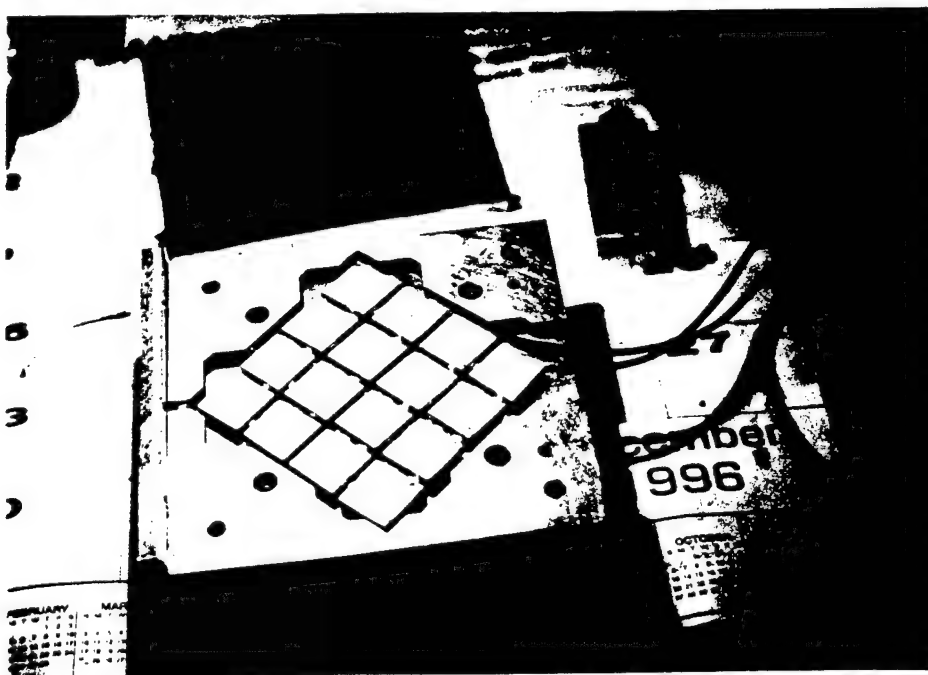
Array with spacers and cables attached placed inside the aluminum mold ready for urethane encapsulation.
